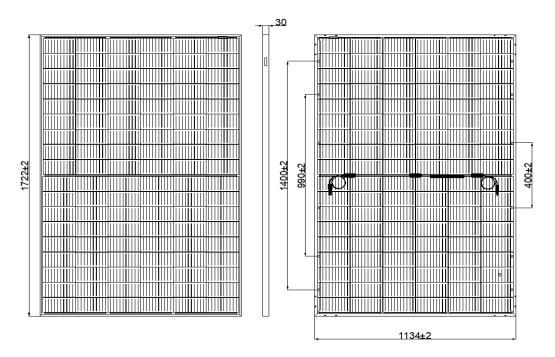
D - Drawings of model with 120 pieces 182\*91 solar cells
